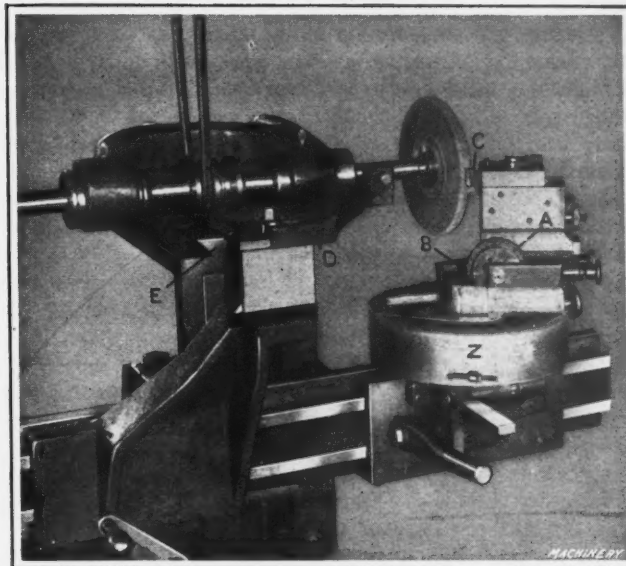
Close-up View of Top of Special Grinding Machine for grinding Relieving Tools and Tracer Points to the Required Form
